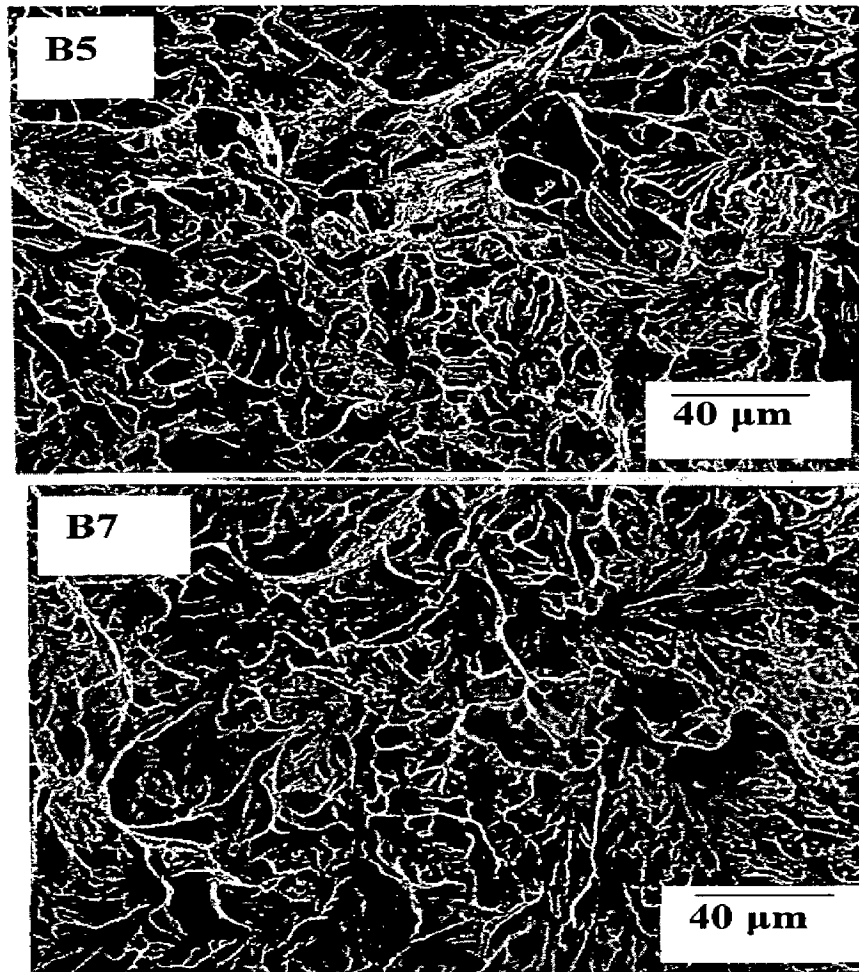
(a) Fractographs of 304 - 4140 weld, B5, B7 at the center (Burn-off length 5, 7 mm)
